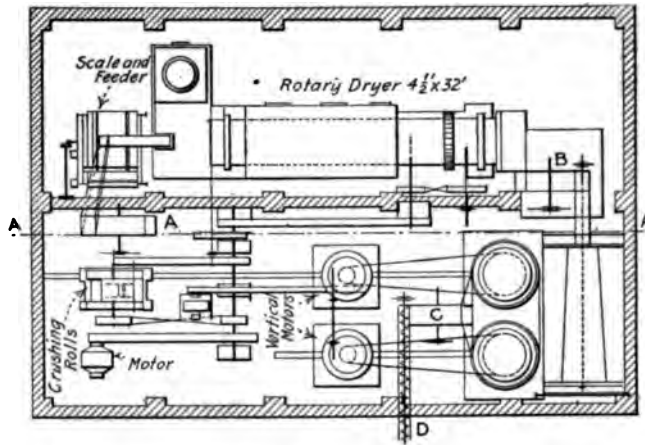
40-FT. BY 60-FT. COAL MILL, MACHINERY PLAN
